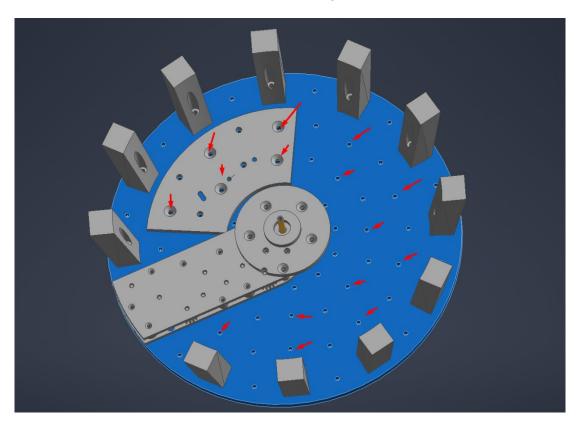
Places to insert motor screws on Stepper motor mount plate (17).
